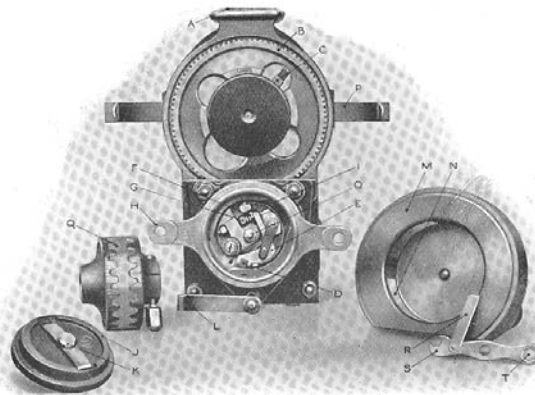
The Magneto, with Contact-Breaker and Distributor Covers Removed.
